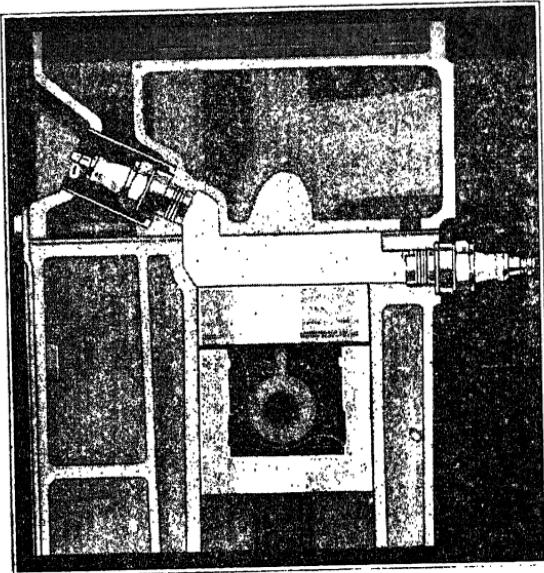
Combustion in Process in Nash Overhead Valve Twin Ignition Engine Cylinder
